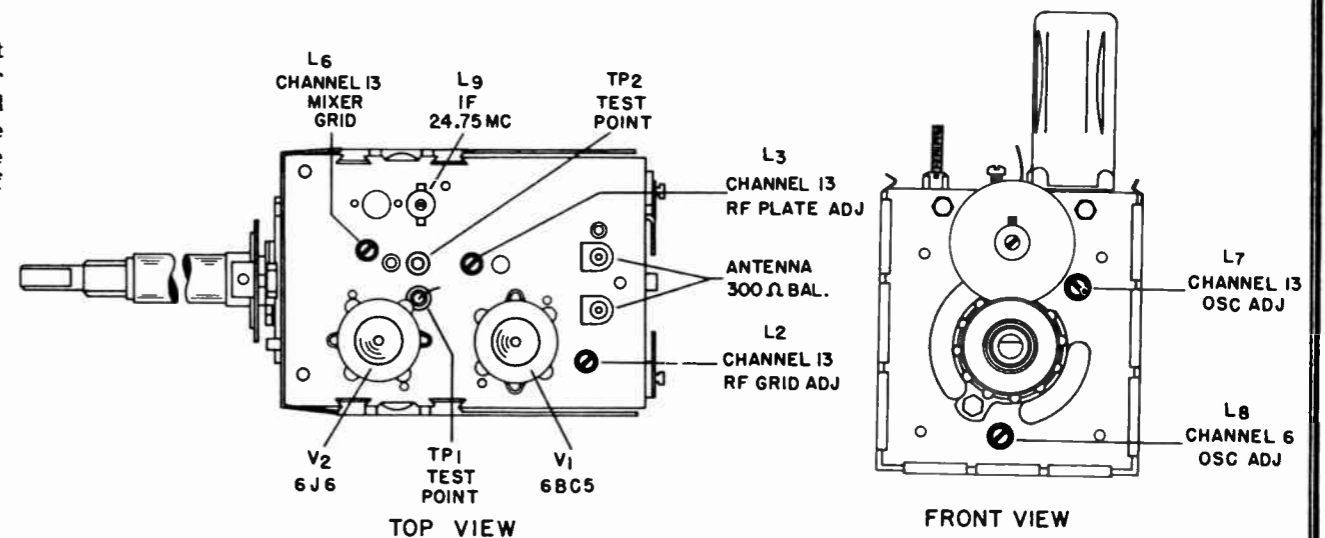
A. 1C1345 or 1E492 Pentode TV Tuner Alignment Adjustments
